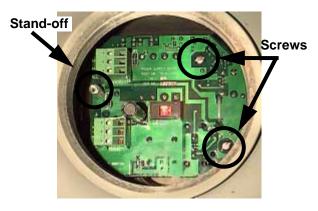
Pwr. Board Stand-off and Mounting Screws
